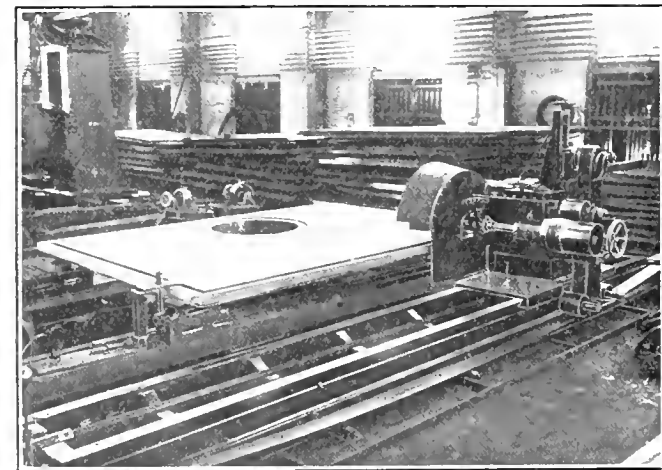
Rear View of Grinder, showing Flying Belt Drive.
